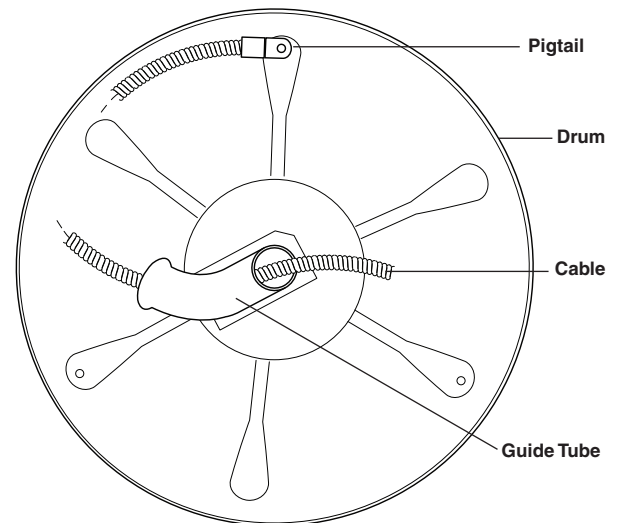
Pigtail Installation/Cable Orientation in Drum (Drum Front Not Shown For Clarity)
